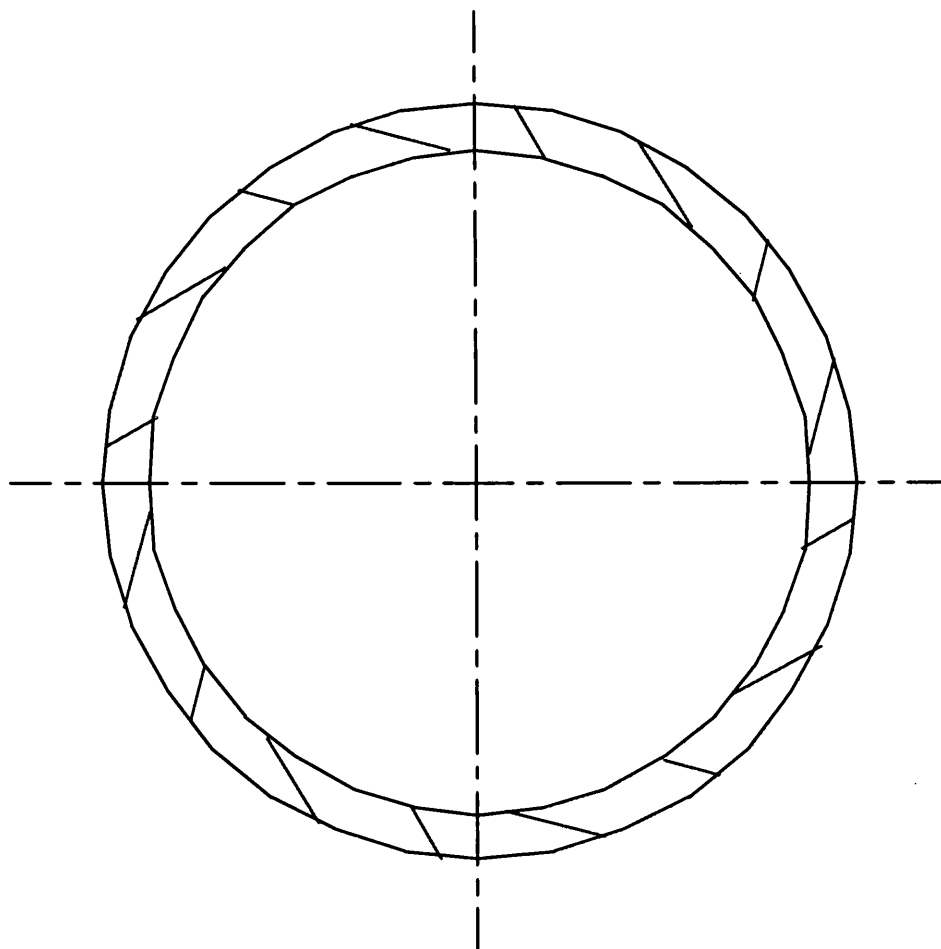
Plan view drawing of flat (high volume) nozzle ring.
